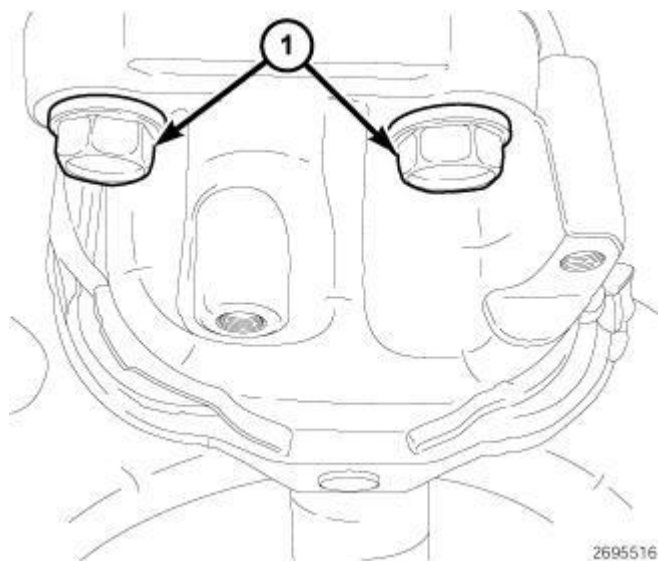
LEFT UPPER ENGINE MOUNT RETAINING BOLTS
